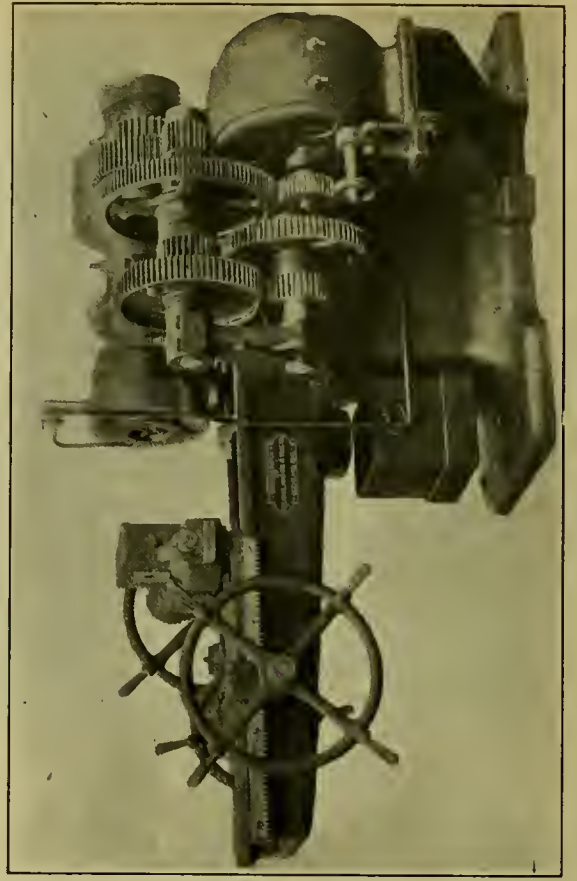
CROCKER-WHEELER MULTIPLE-VOLTAGE DRIVE UPON A 3-INCH BOLT CUTTER.—RELIANCE MACHINE AND TOOL COMPANY.
